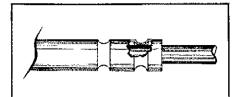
Use the new roller to groove the larger tube of a slip joint. This reduces the tube's inner diameter slightly to provide a snug fit with a smaller tube.
